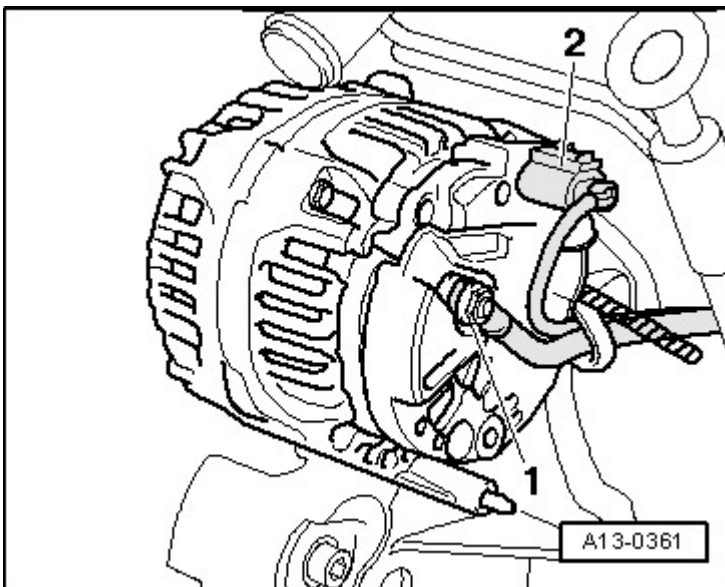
Identifying Generator Electrical Connector And Terminal B+
